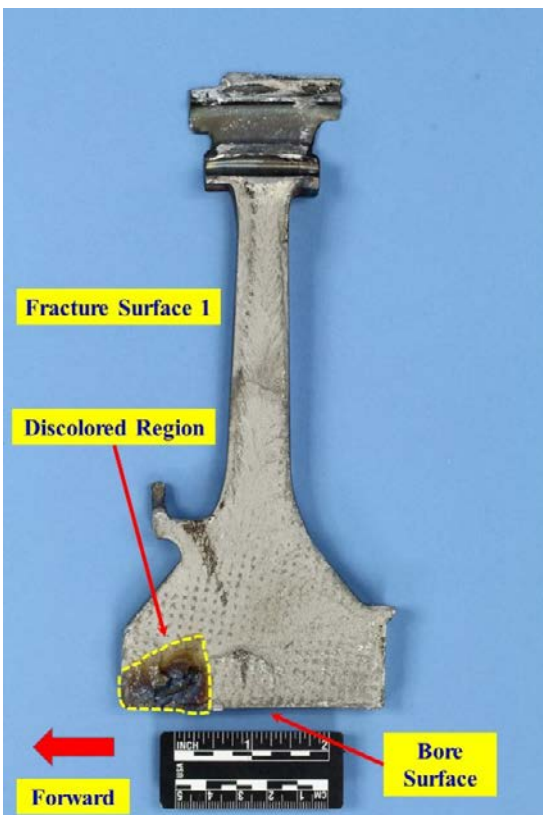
FRACTURE SURFACE 1 PRIOR TO CLEANING
